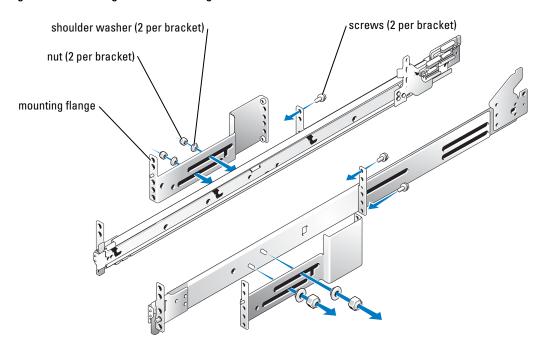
Rotating the Front Mounting Bracket for Flush-Mount Installation
